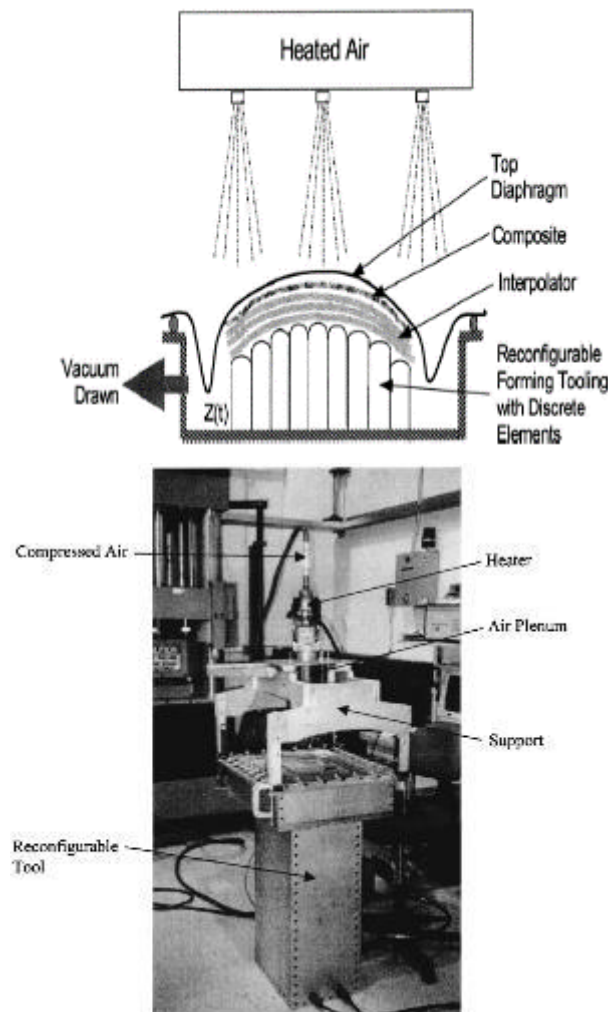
Reconfigurable tool forming process and experimental set-up [126]
